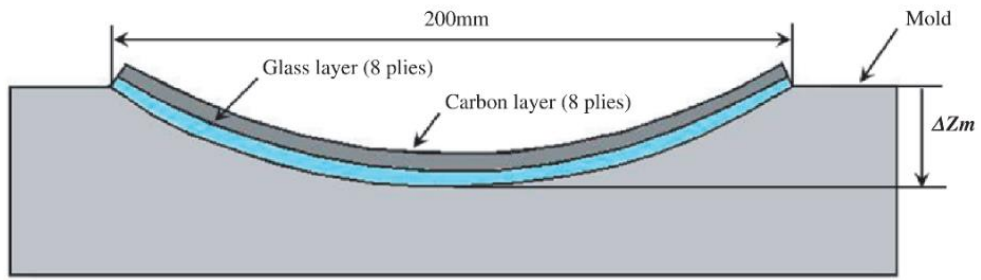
Compensated mould for hybrid composite beam. [65]
